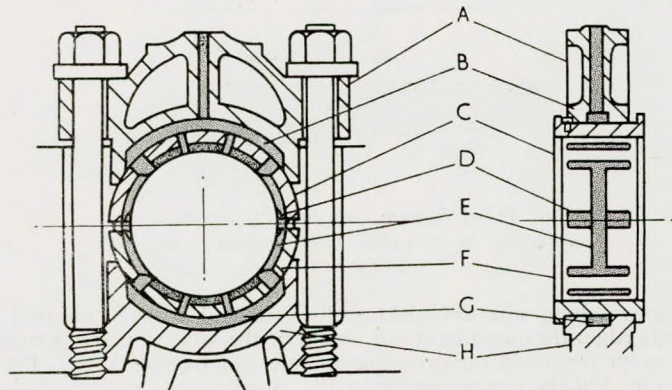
Main bearing (Burmeister and Wain patented construction)
